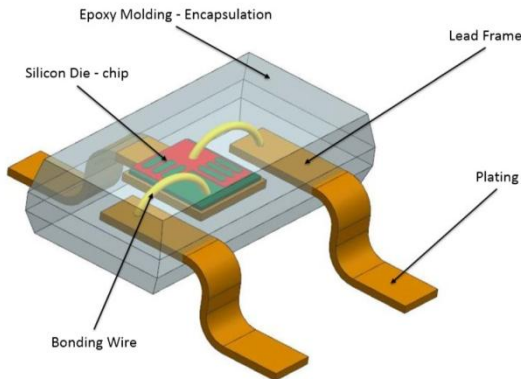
Schematic view of the parts of a transistor SMD SOT23.
